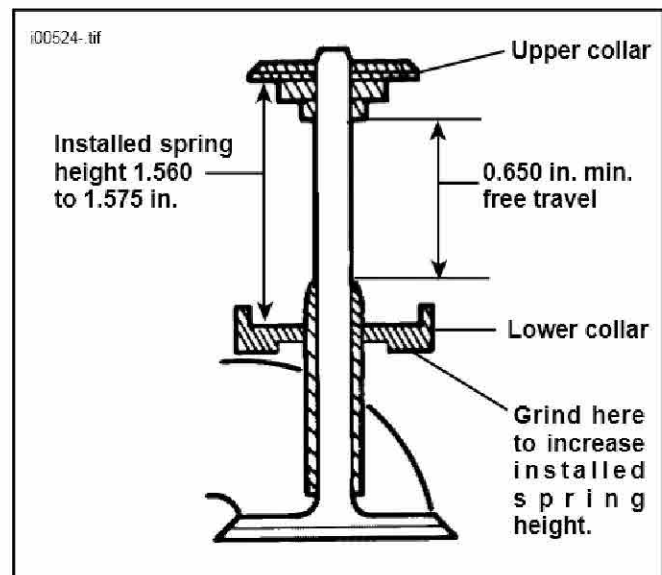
Valve Free Travel Check and Installed Valve Spring Height
